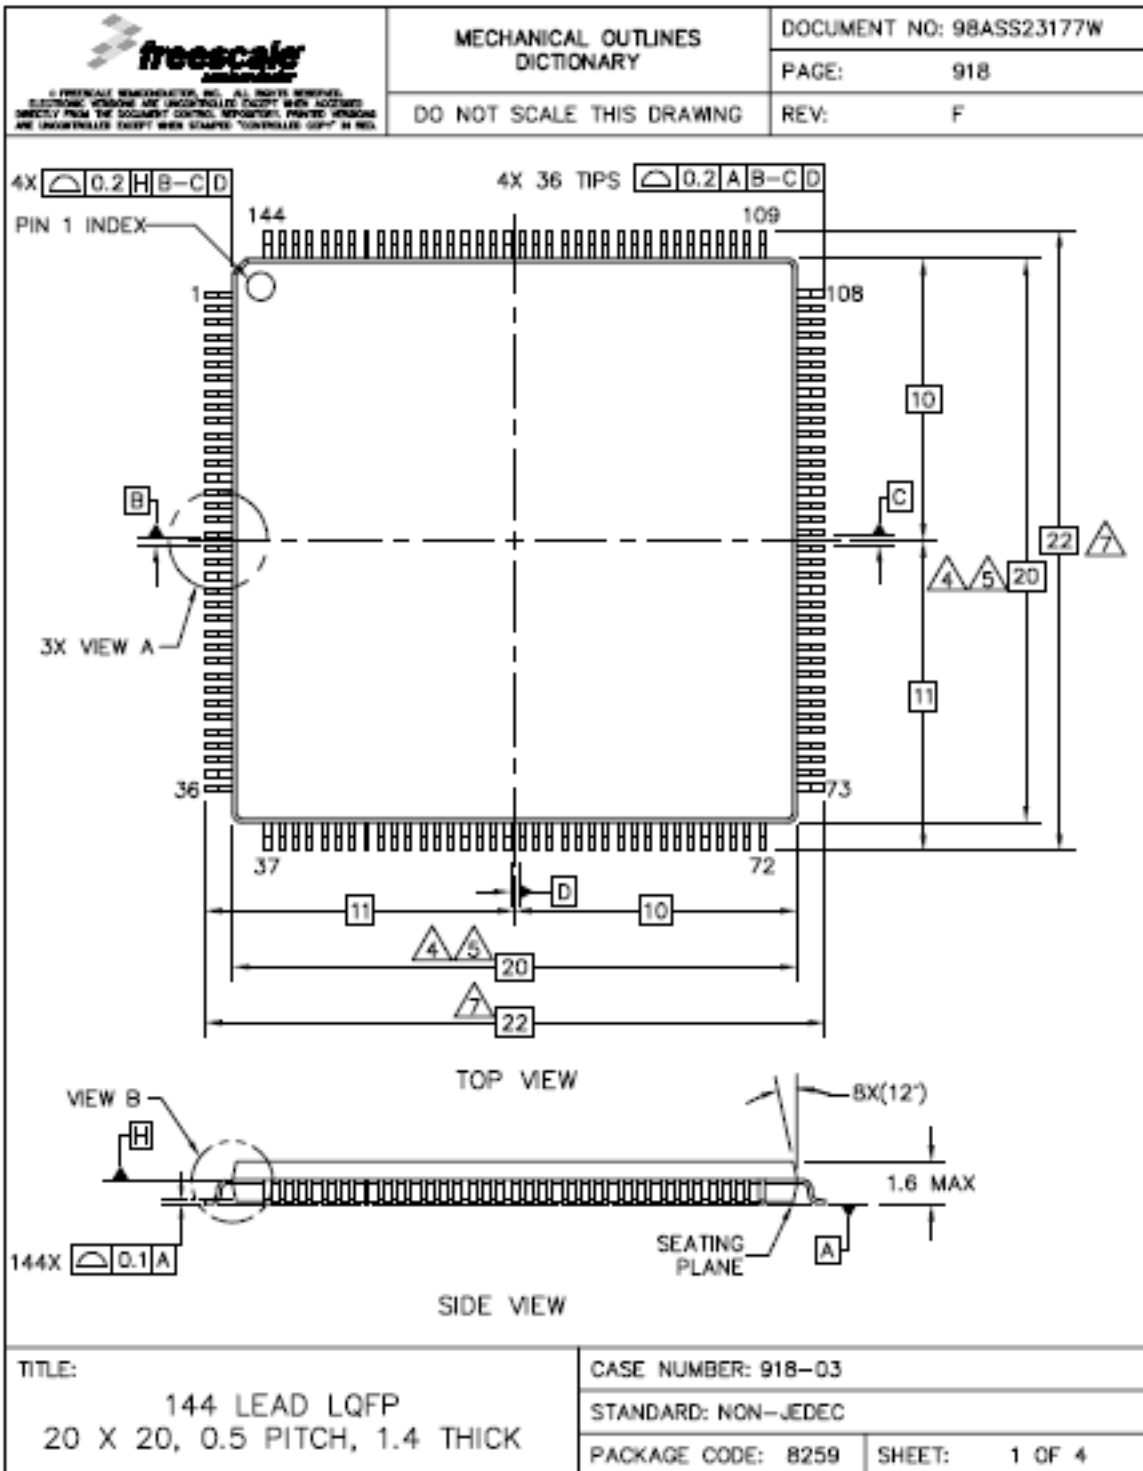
144-Pin Package Outline Drawing (1 of 4)
